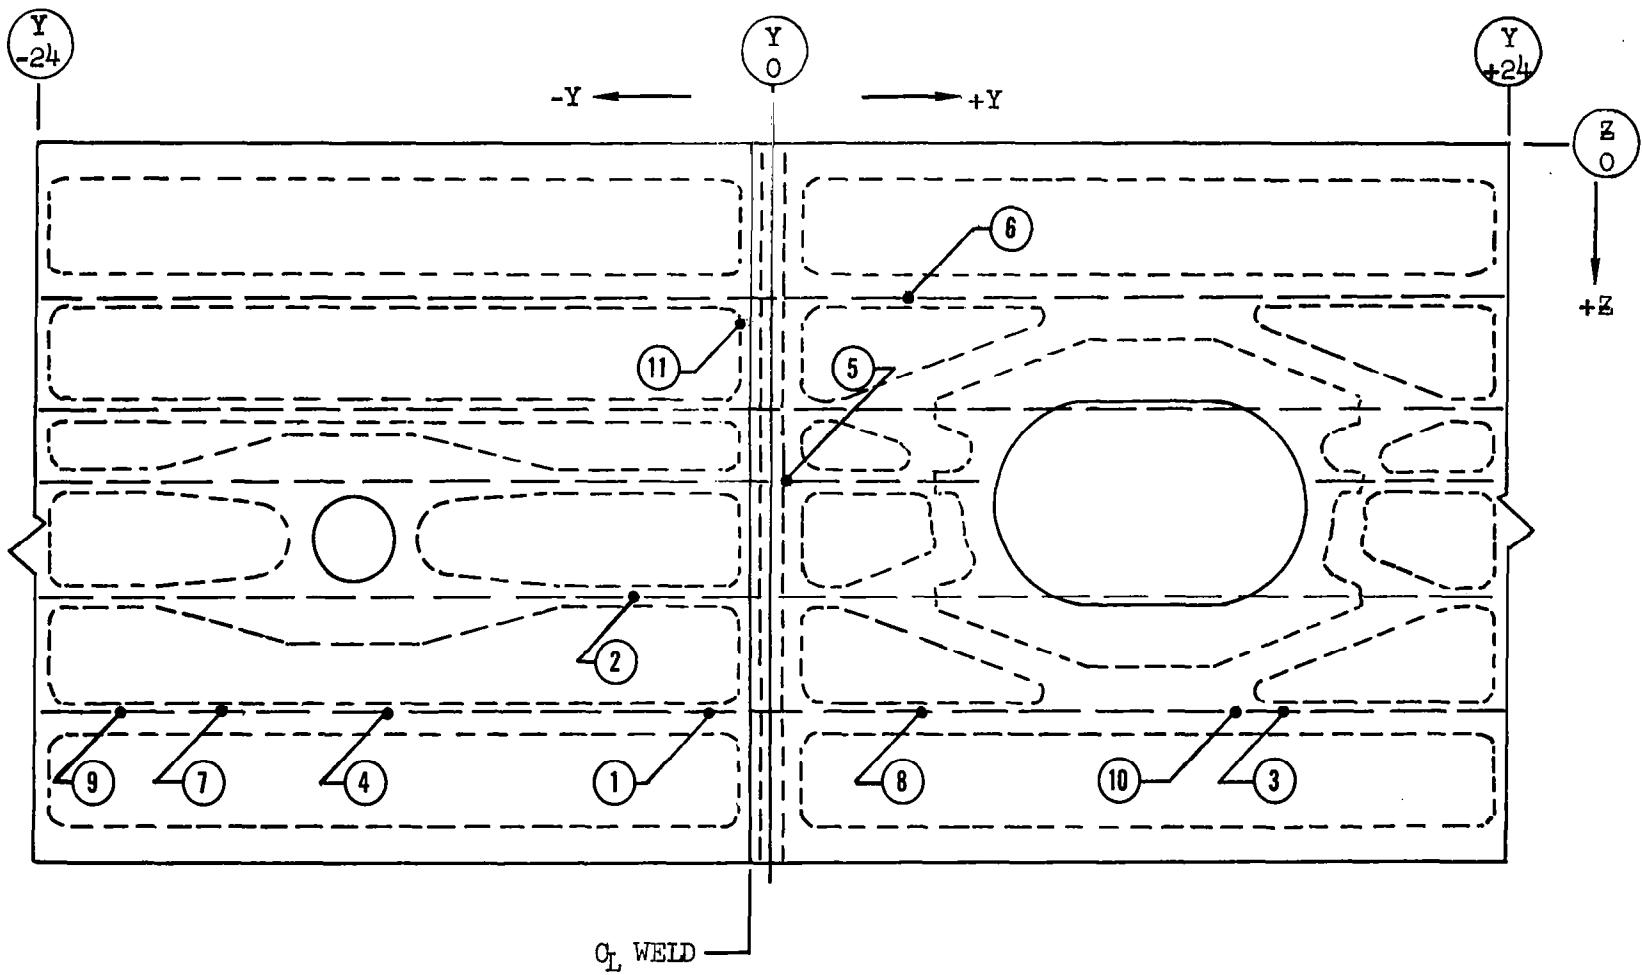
Fatigue Crack Locations in Specimen No. 3
